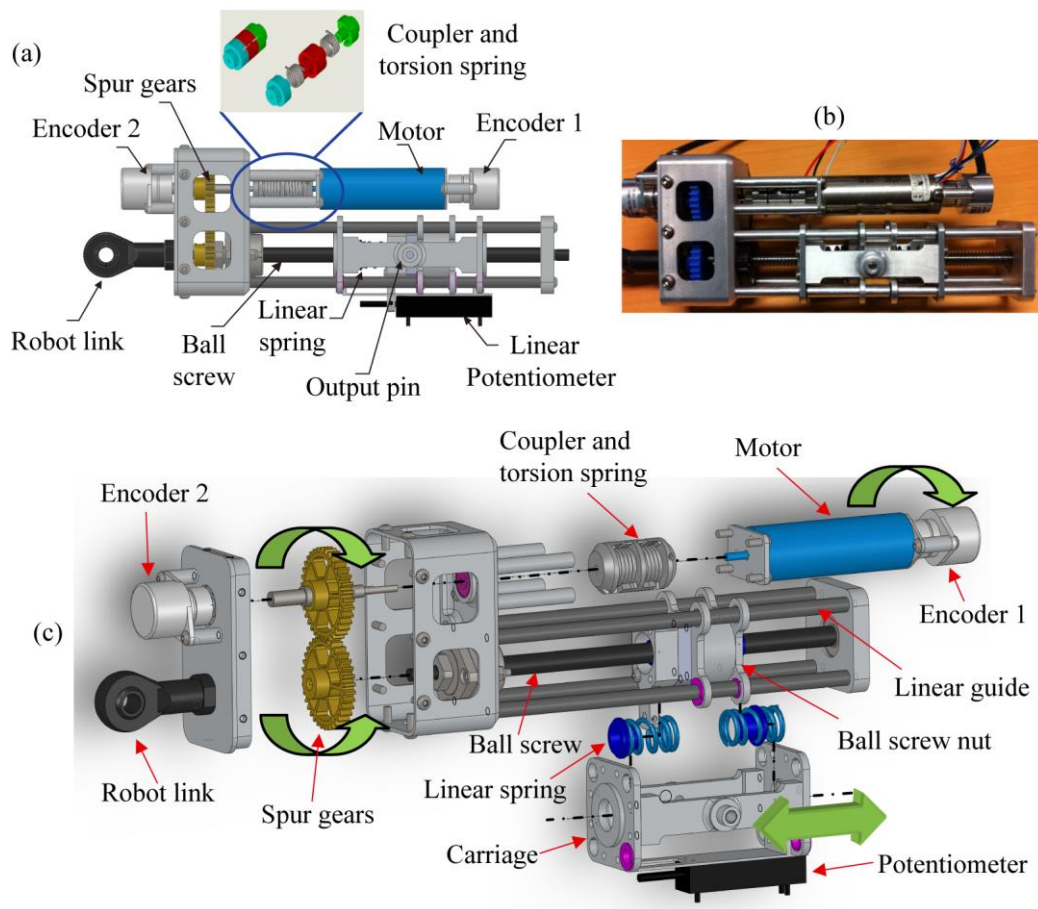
(a) CAD model and (b) the prototype of the compliant force controllable SEA and (c) exploded views of the actuator and directions of motion transmission.
